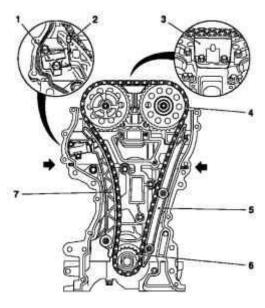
Removing the timing chain drive mechanism: 1 - timing chain, 2 - a special tool, 3 - slide 4 - timing chain drive mechanism; 5 - slide 6 - asterisk, 7 - directing tension
